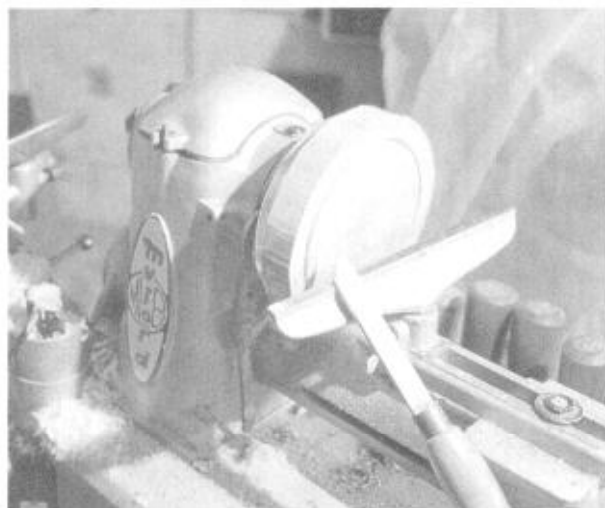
The blank,  $6\frac{3}{4}$ in (171mm) in diameter and 1in (25mm) thick, which will form the base of the board. The blank was then screwed on to a faceplate while being shaped. The bottom was  $6\frac{1}{2}$ in (165mm) in diameter, the top 5in (127mm) in diameter, and the step  $\frac{1}{4}$ in (6mm). The top fits into the recess on the underside of the playing surface, the space between being used to store the pieces when not in use. The screw holes were filled with plastic wood and the whole surface covered with green baize.
